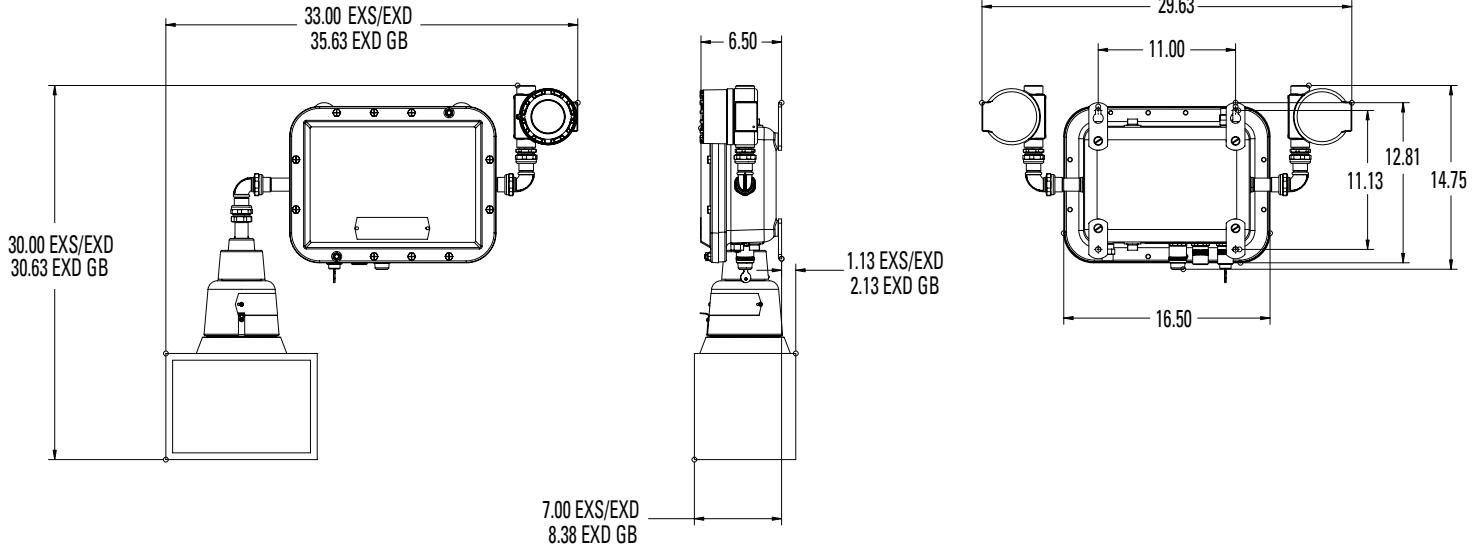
ELPSM22 and ELPSM22 EXS/EXD Dimensions
